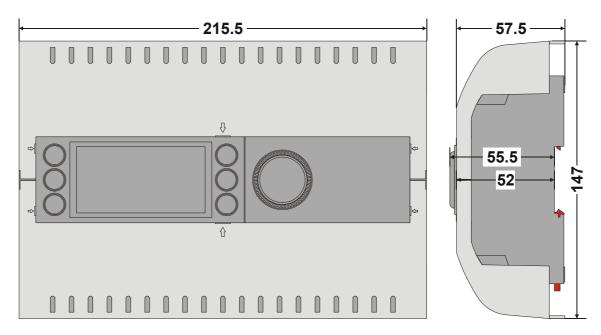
EAGLE Controller (shown here with two MVC-80-AC1 covers in place), dimensions (in mm) NOTE: Use of the MVC-80-AC1 will obstruct access to the ETHERNET and USB 2.0 Device Interfaces
